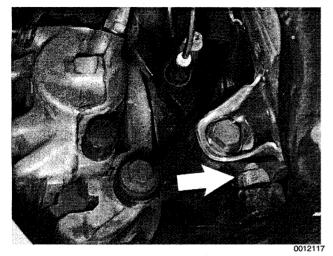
Control arm ball joint nut at steering arm (arrow).
